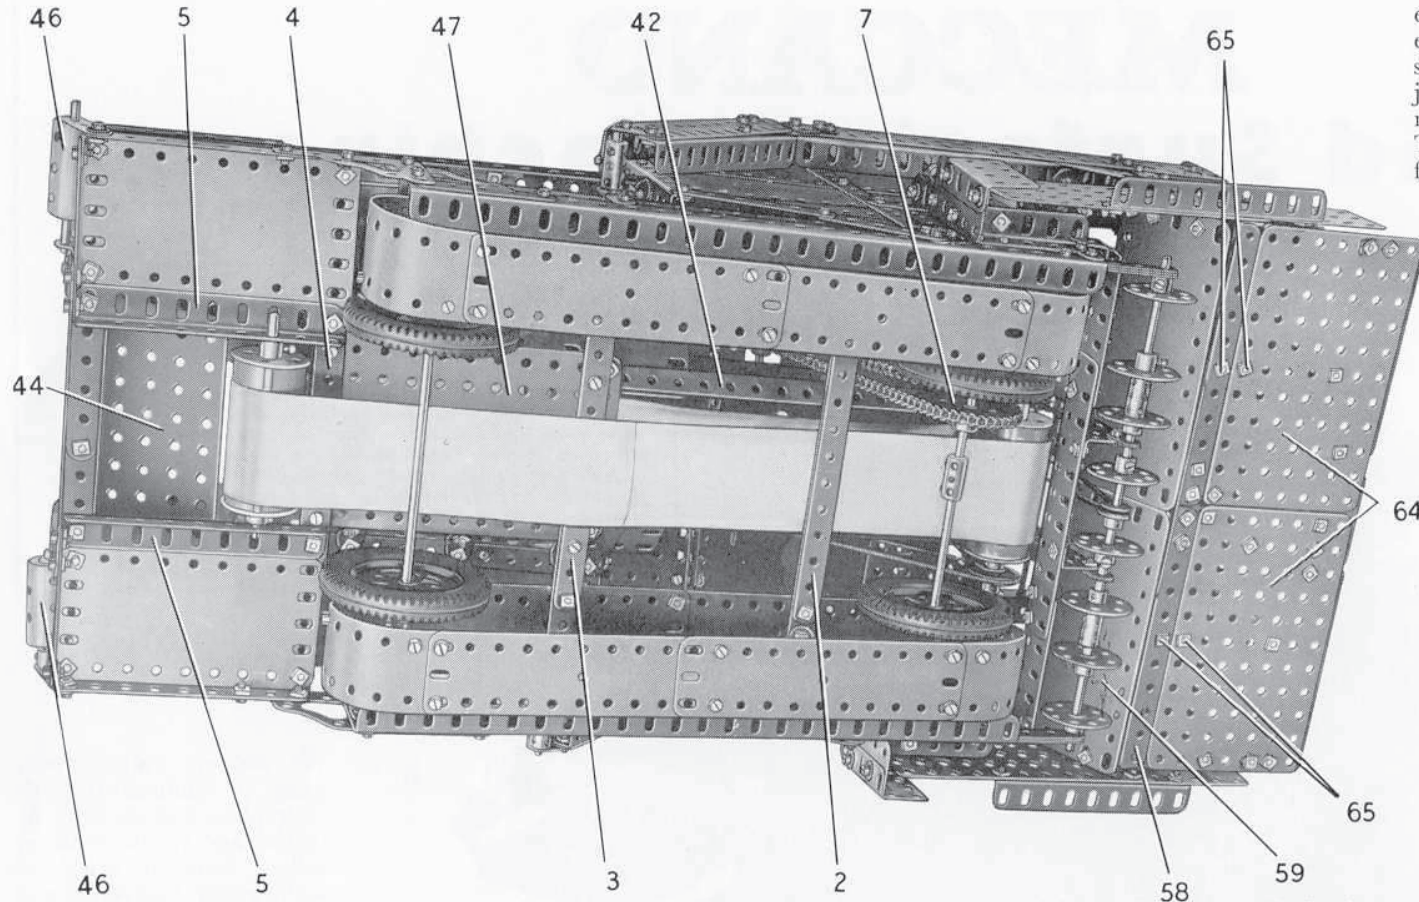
An underneath view of the Road Surfacing Machine showing details of the main frame and the conveyor. As the asphalt leaves the conveyor it is distributed over the road surface by the column of revolving Bush Wheels seen at the rear end of the machine
